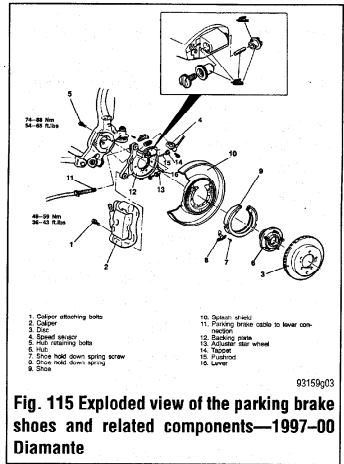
Exploded view of the parking brake shoes and related components—1997-00 Diamante
